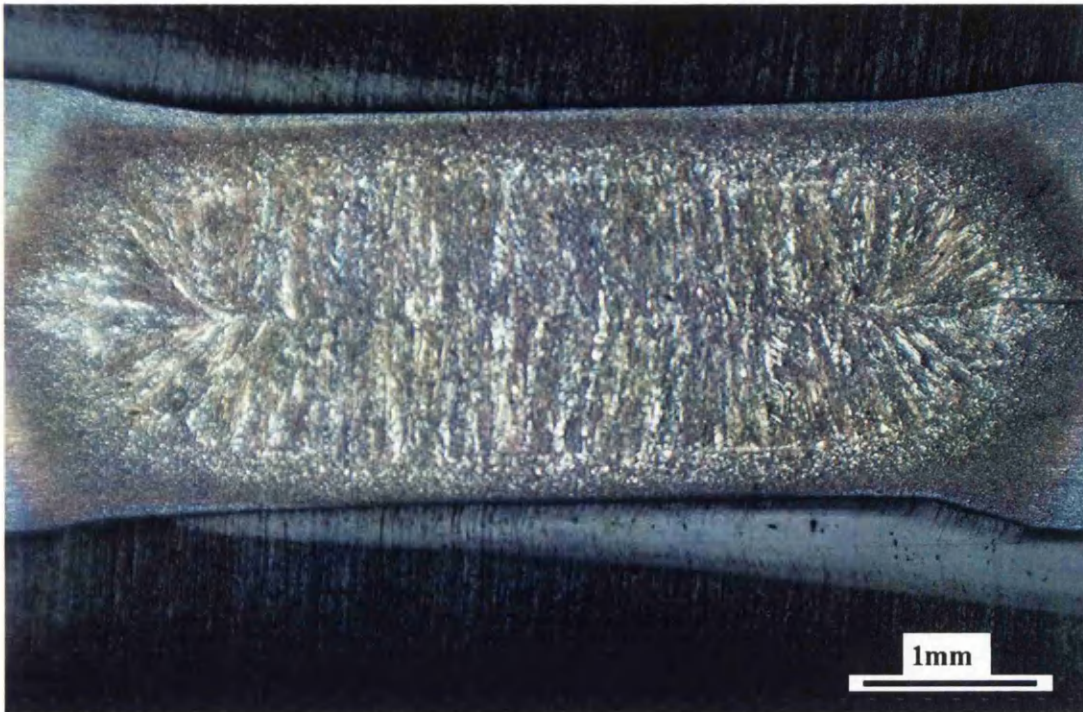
Macro of $5\sqrt{t}$ spot weld formed in 1.2mm DP1000
